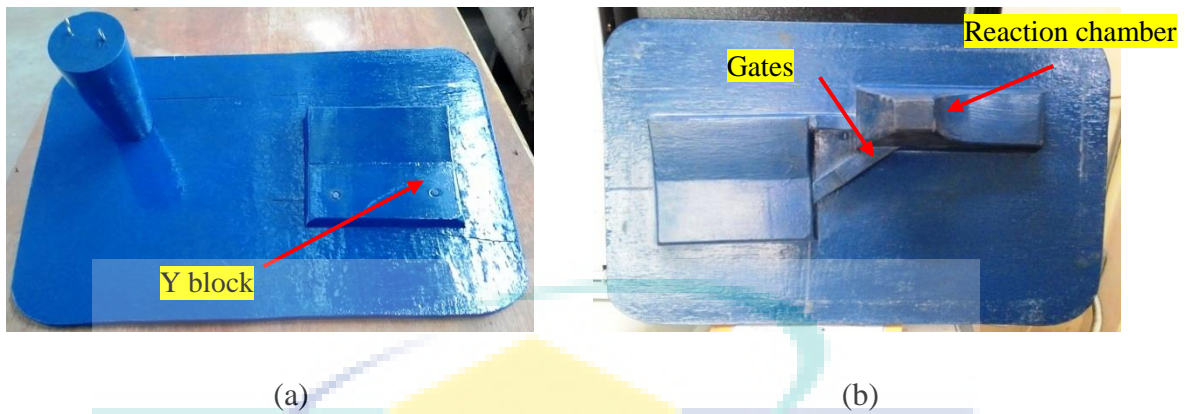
Pattern was fabricated according to ASTM standard (a) upper side of the pattern (b) below side of the pattern
